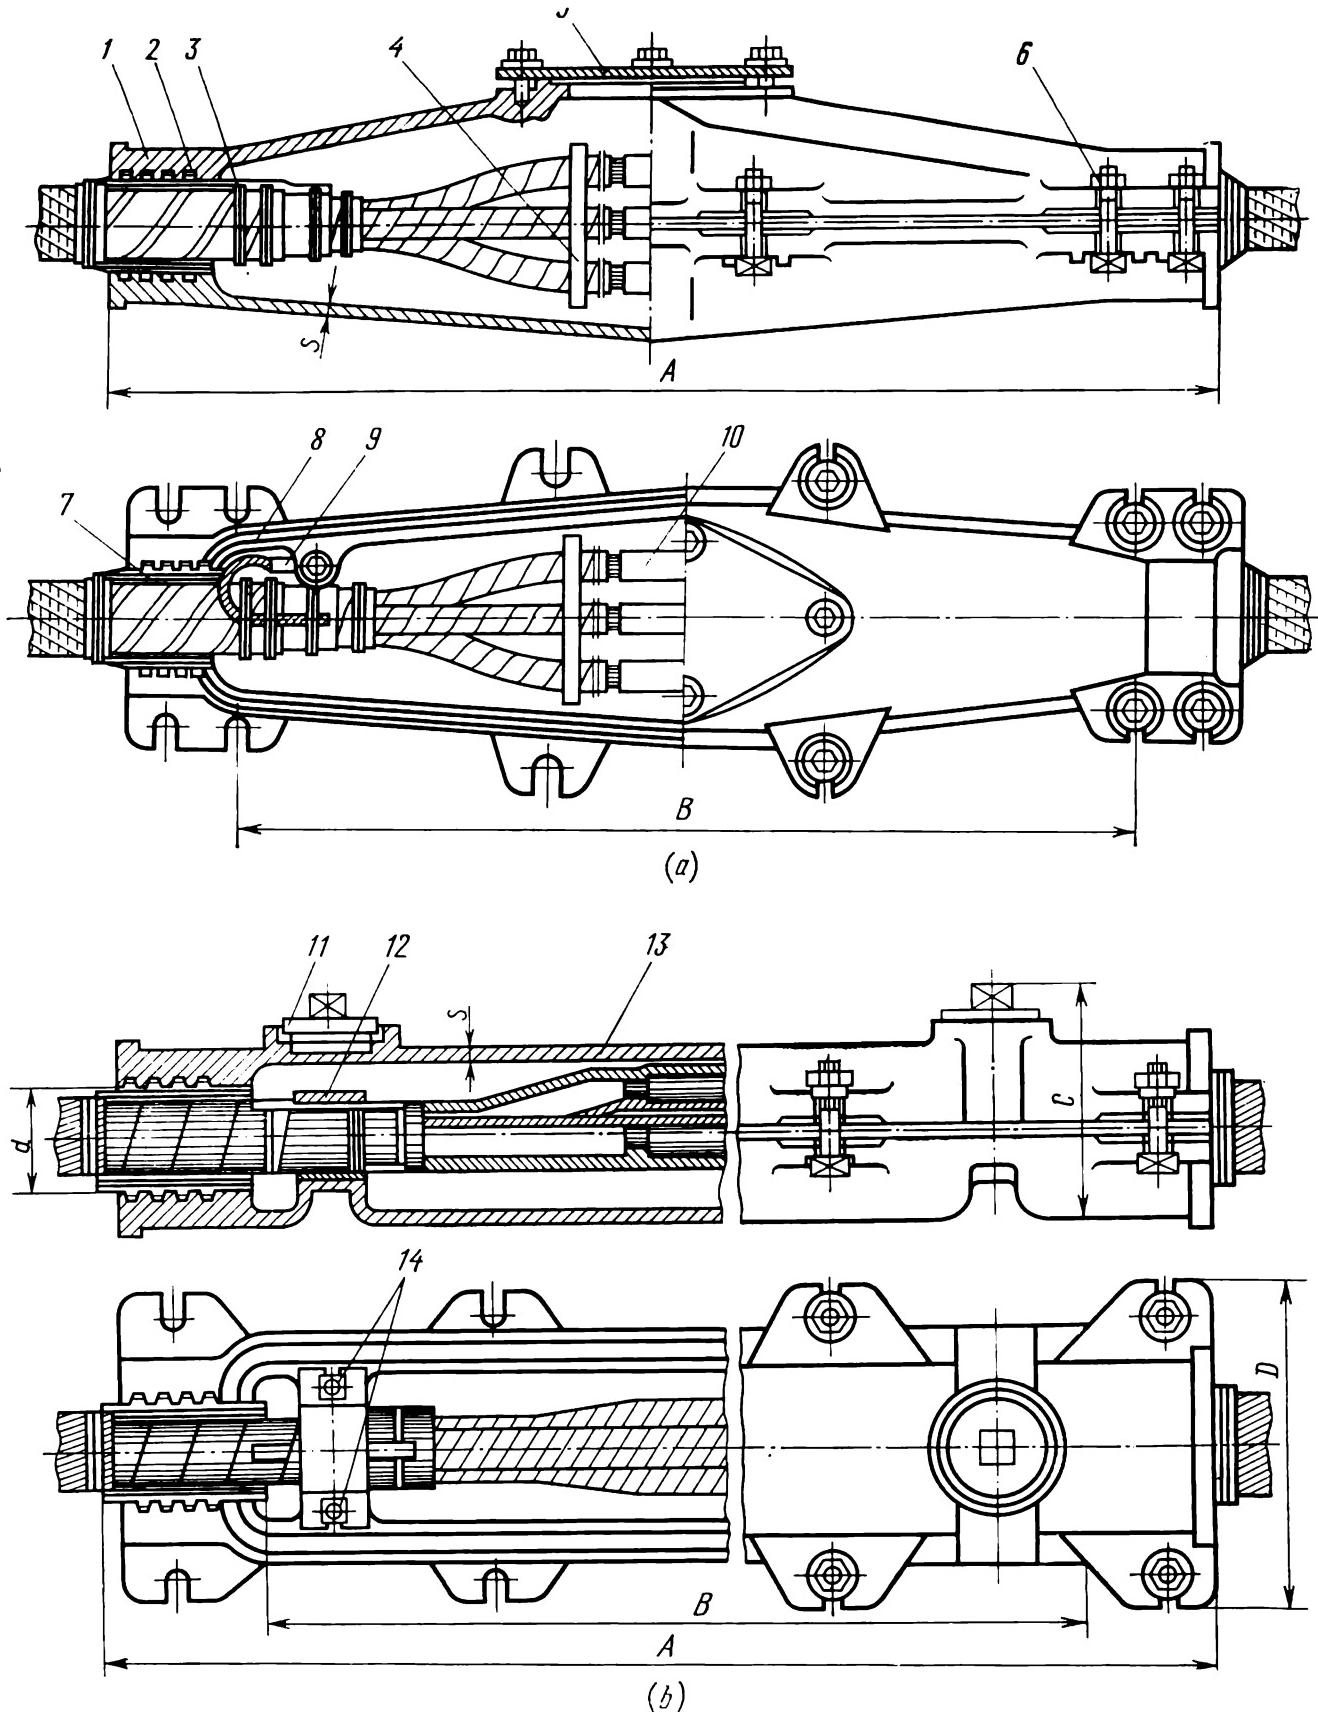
Cast-iron jointing sleeves for up to 1-kV cables
